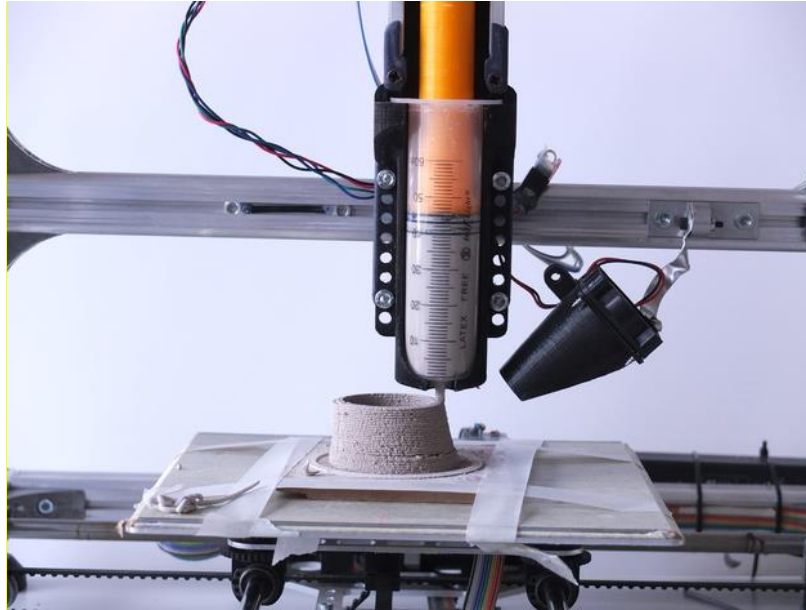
3D Printed Syringe Adapter for 3D Printers
